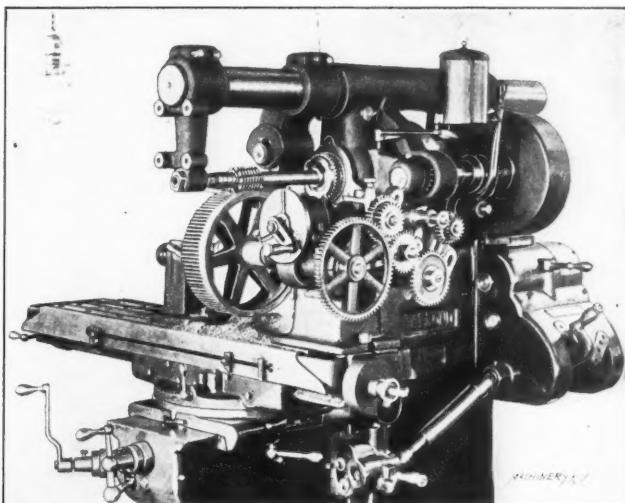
Hobbing a Spur Gear with the Hobbing Attachment on a Universal Milling Machine.
